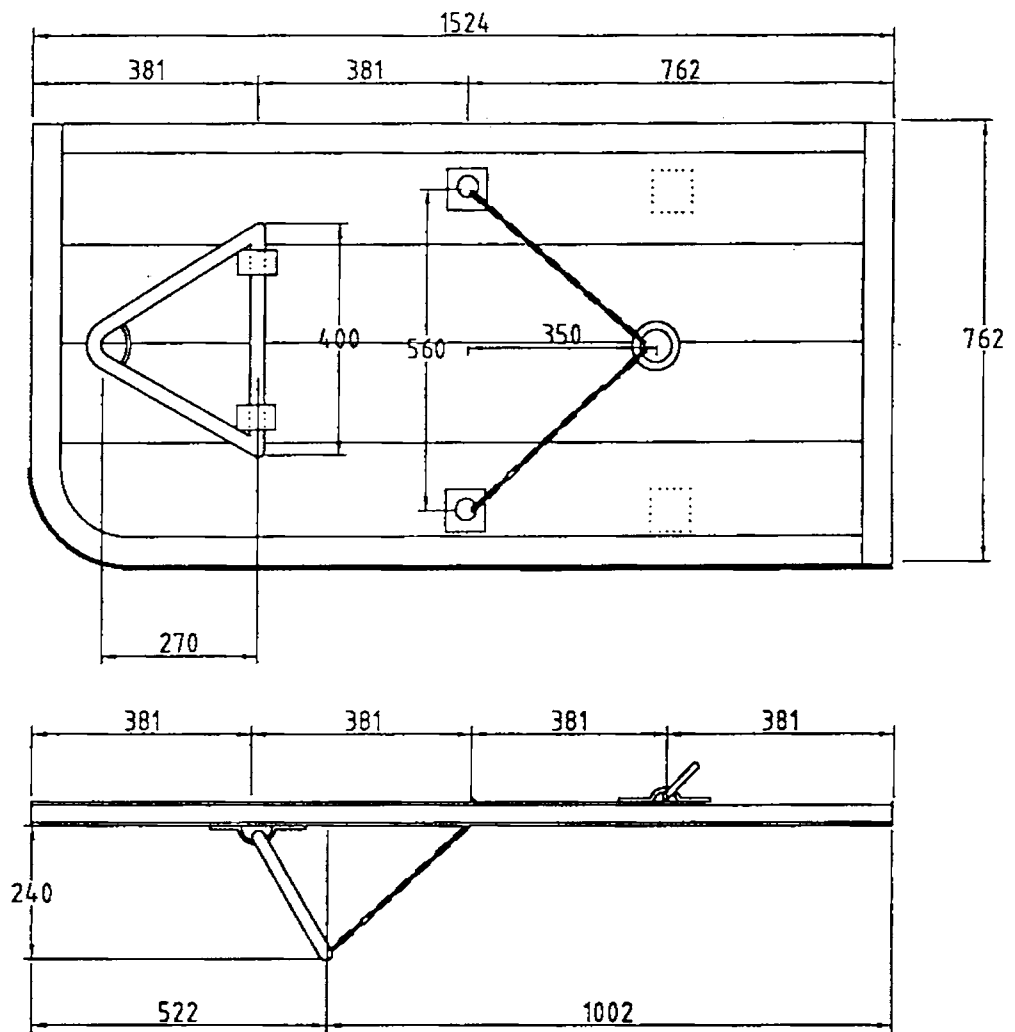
Design details of flat rectangular otter board of wood and steel construction (1524x762 mm; 75 kg.)
